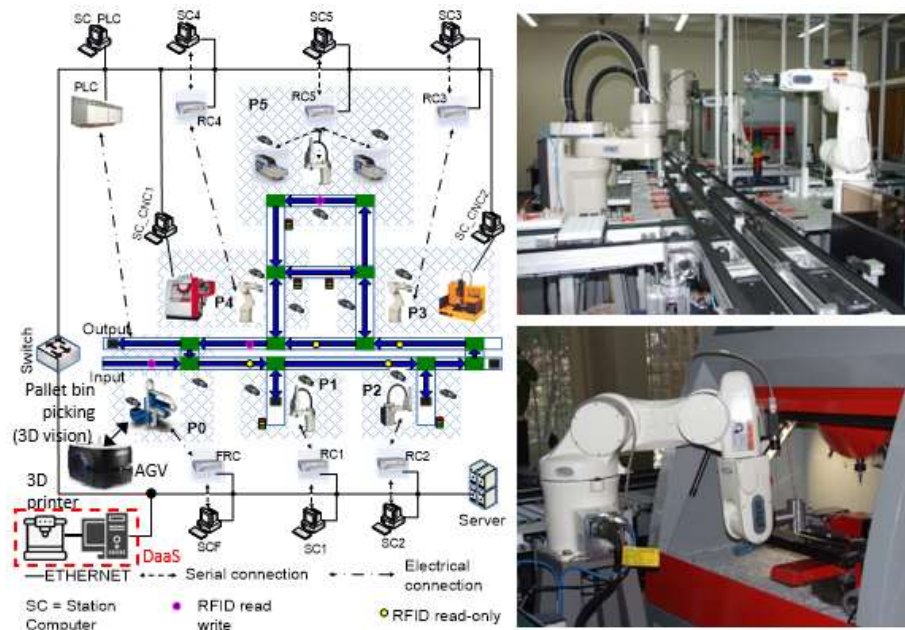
Pilot manufacturing cell (the factory): layout (left); global view, machine tending (right)
